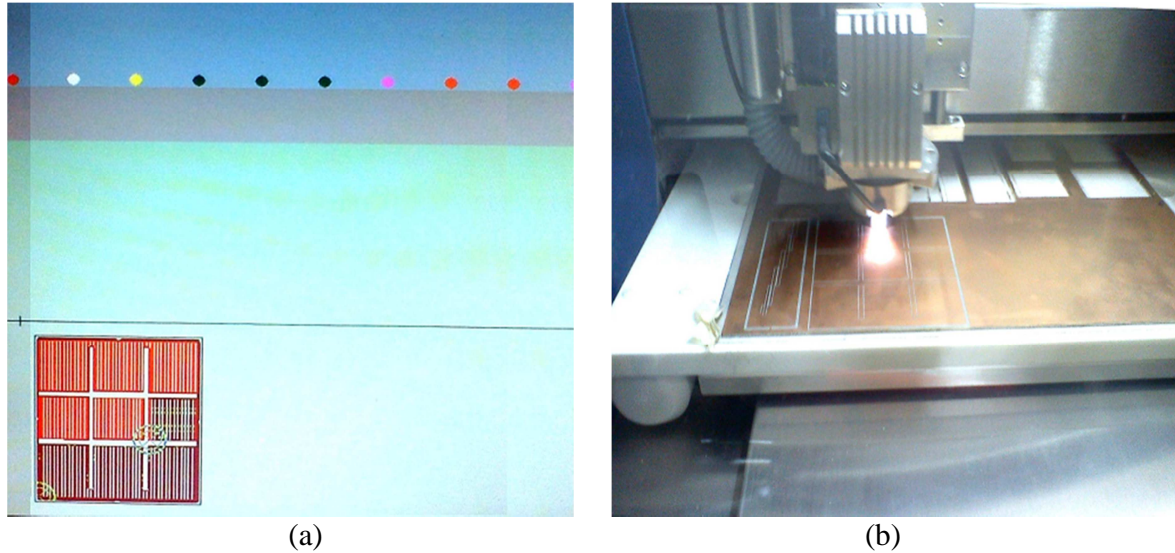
(a) Board Master. (b) ProtoMat S Machine
